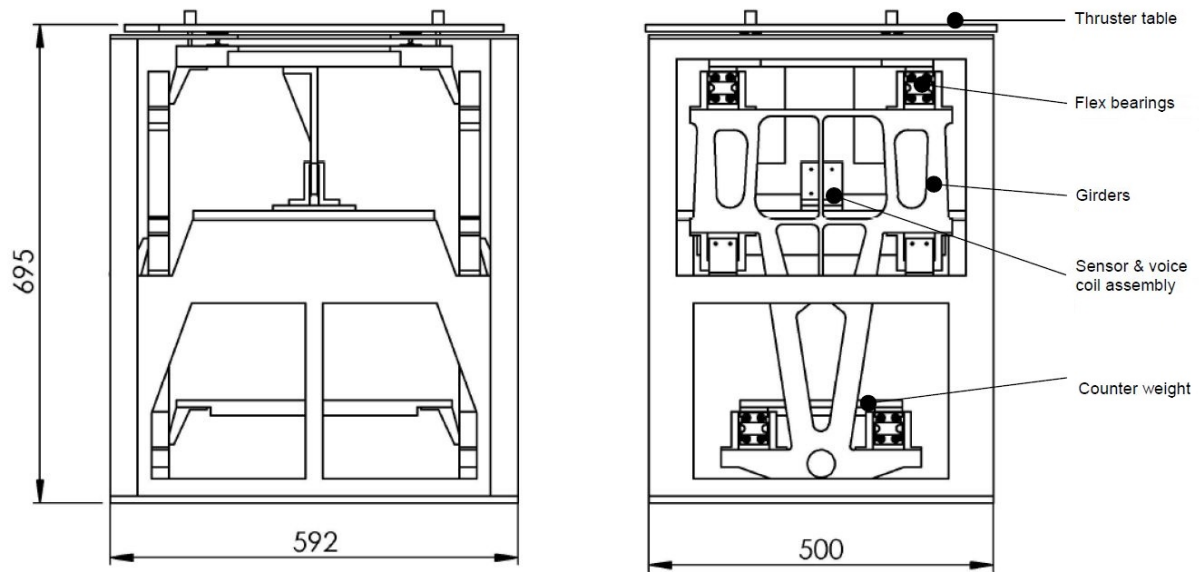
Side and front view drawings of the thrust balance without cover sheets (all dimensions in mm).
